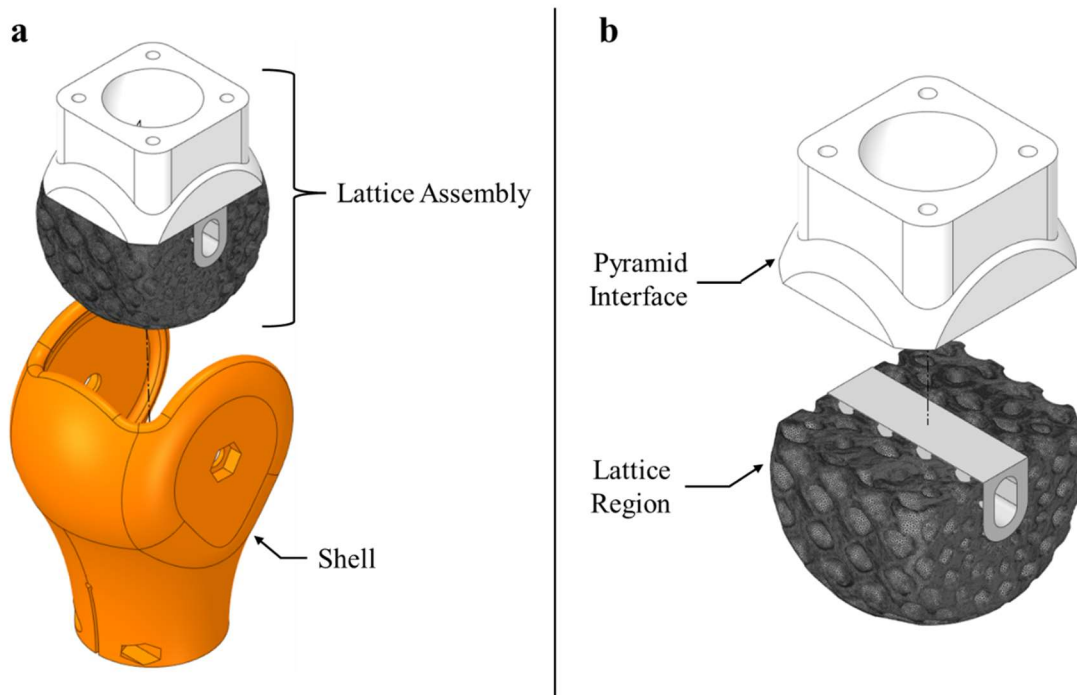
(a) Exploded view of 3D printed components (b) Exploded view of lattice assembly.
